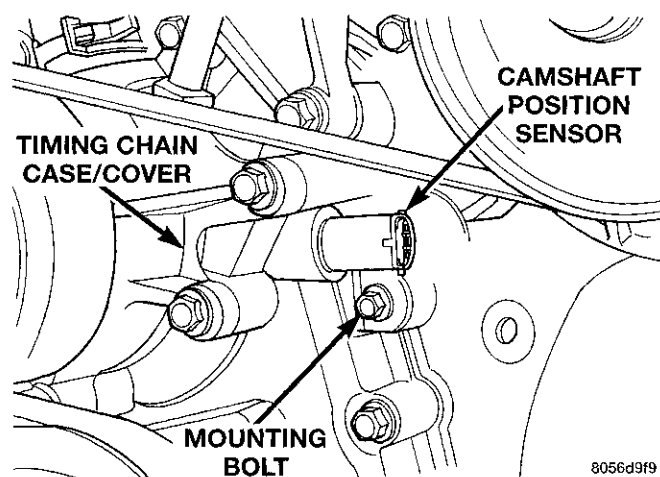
Camshaft Position Sensor Location—8.0L V-10 Engine
